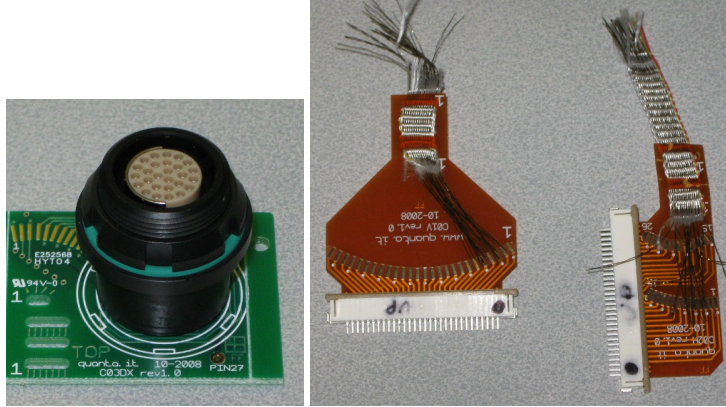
Vacuum connector from inside to outside the fridge mounted on its PCB (left). Termination example of the NOMEX[®] ribbon cable partially assembled on Kapton PCBs and inserted into ZIF connectors (right).
